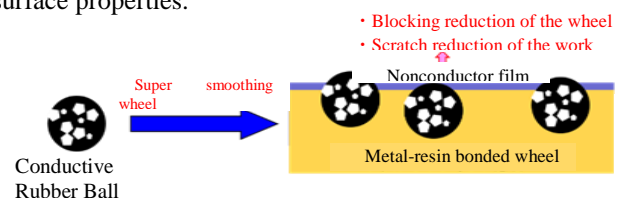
Image of the grinding in the grinding wheel containing Conductive rubber balls
